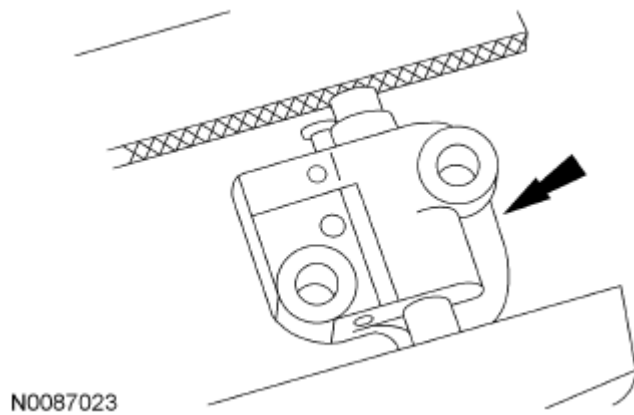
Positioning Chain Tensioner In Soft-Jawed Vise
